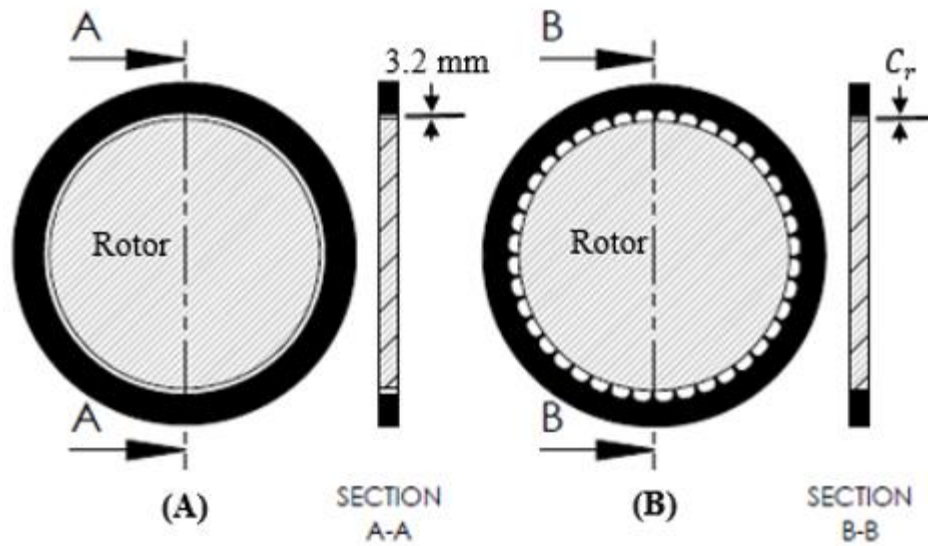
Front view of spacer ring (A) and swirl brake (B) possible options.
